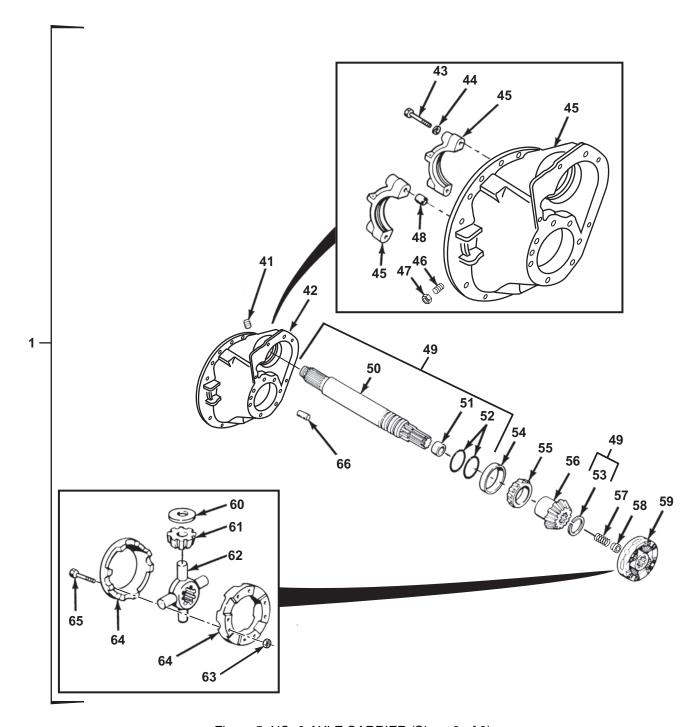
NO. 3 AXLE CARRIER (Sheet 2 of 3)
